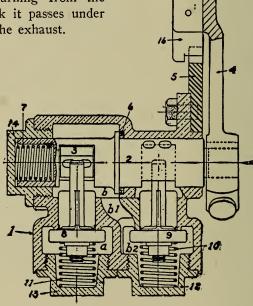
Westinghouse Straight Air Brake Valve Showing Valve 9.
